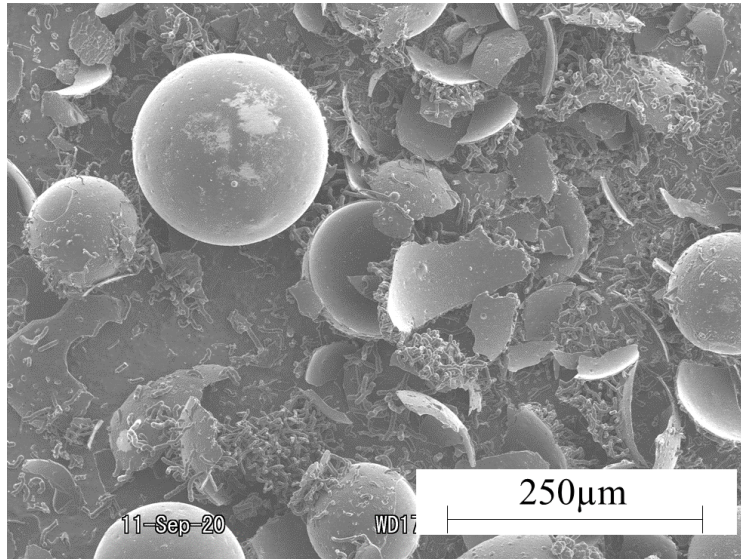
Fracture surface of PP/RM/C tensile test piece.
